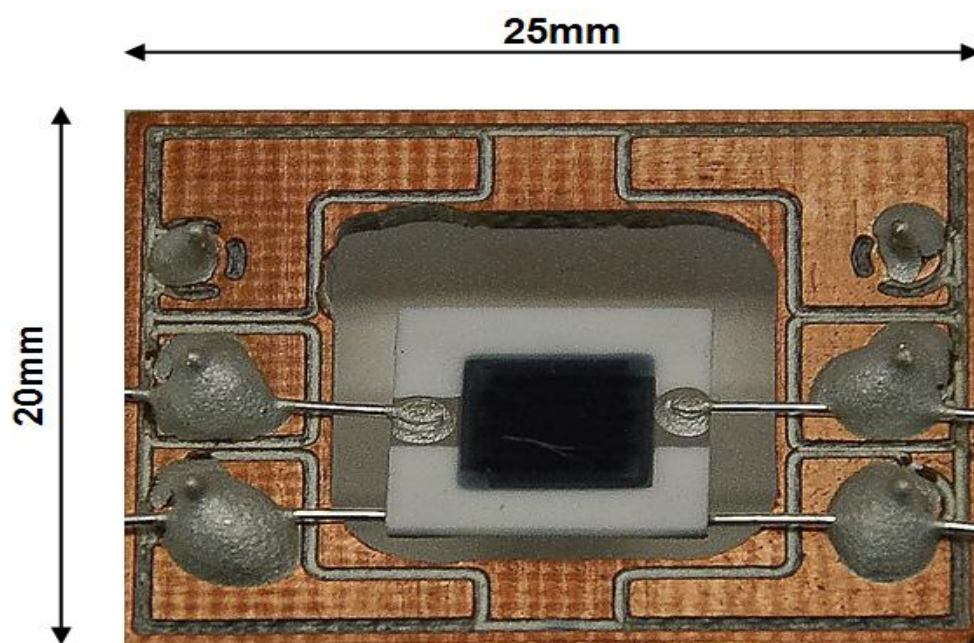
The front view image of alumina gas sensor soldered onto the PCB holder
